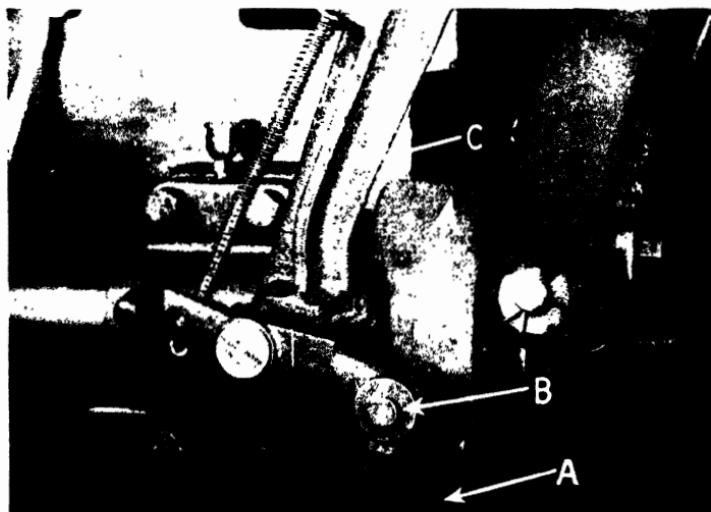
Clutch throwout mechanism (nonrepeat device) on a guillotine paper cutter. (*Courtesy of Seybold Machine Company Division of the Harris-Seybold-Potter Company.*)
